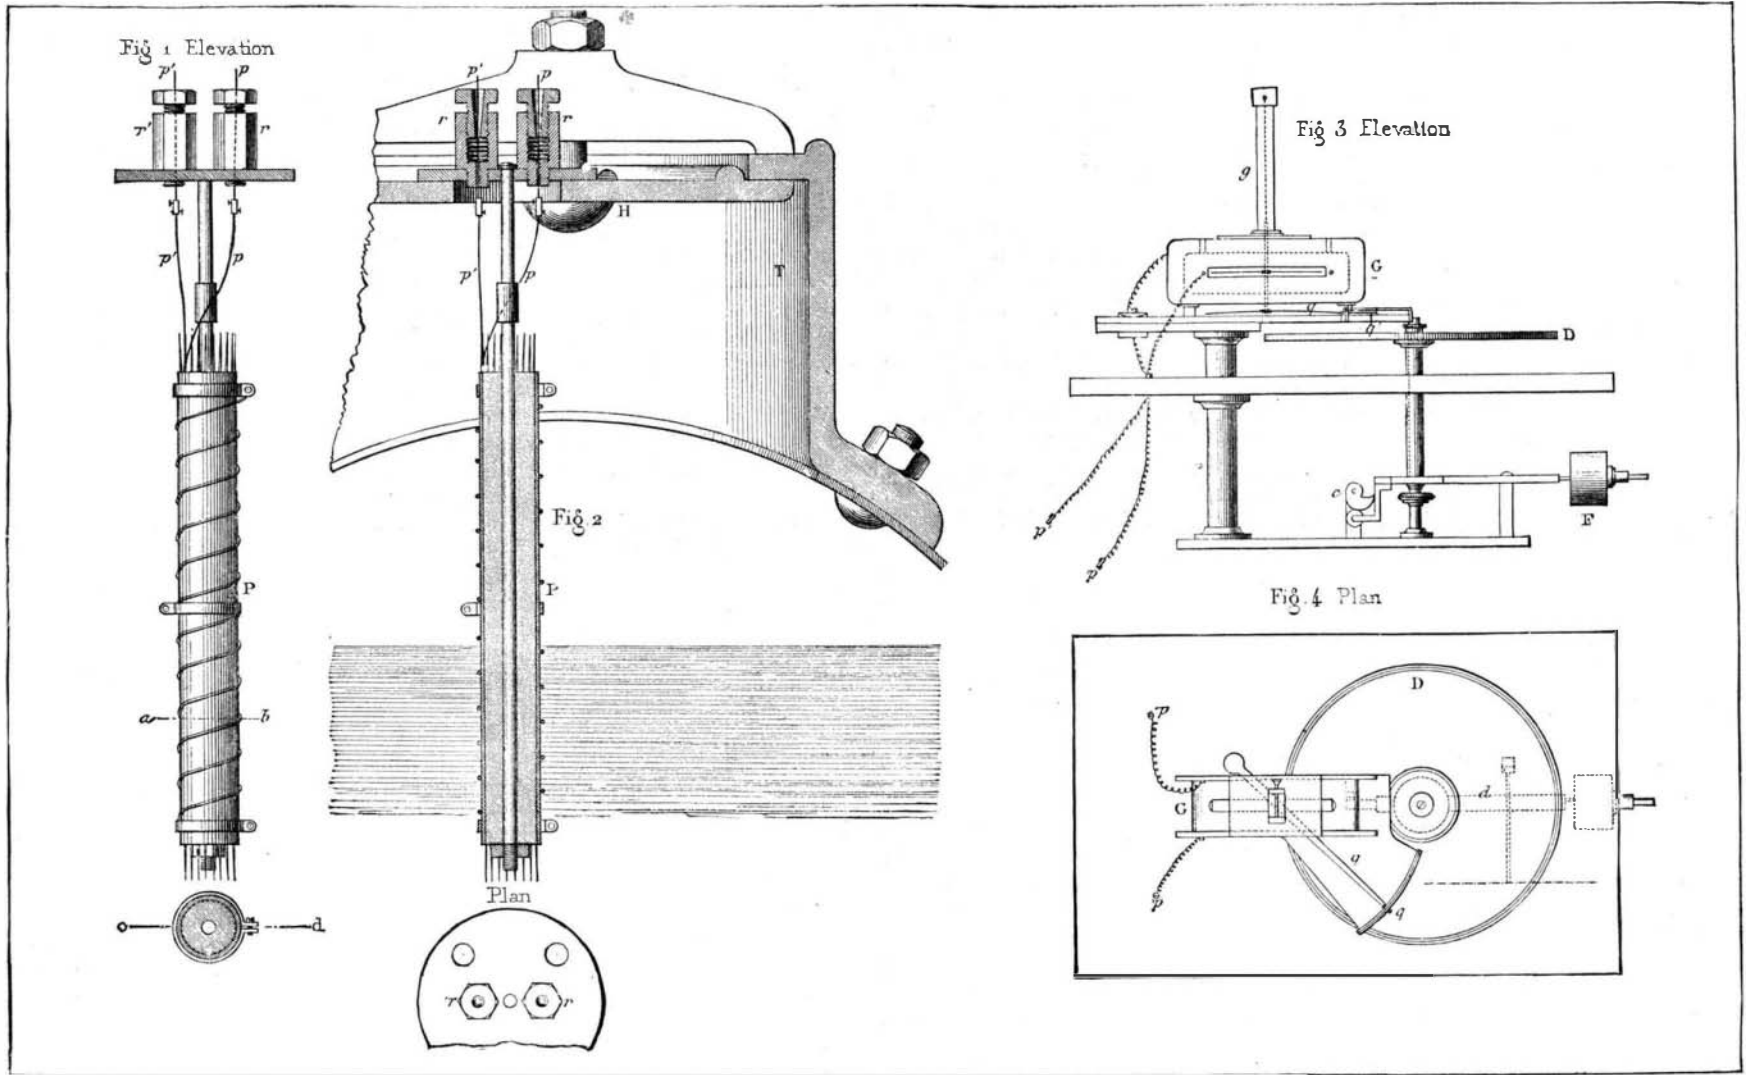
Elevation. Fig 2.—Section through *cd*. Fig 3.—Elevation. Fig 4.—Plan (Scale 1/4).
